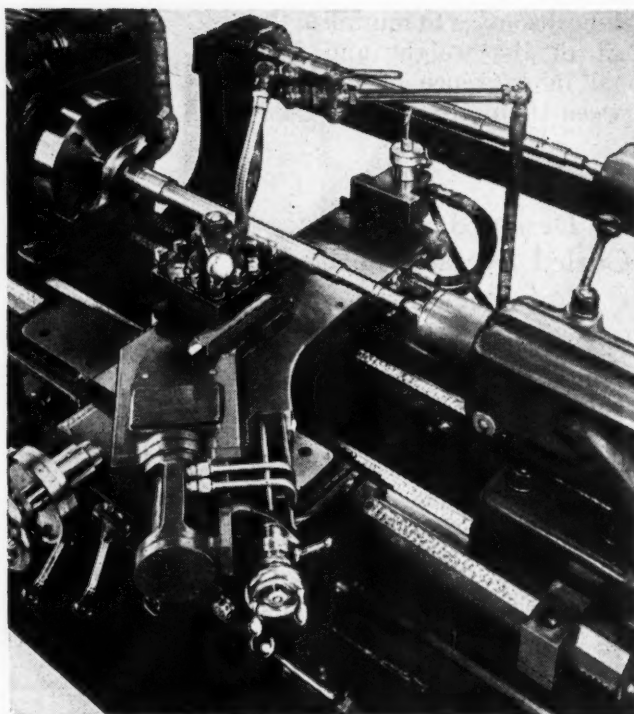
Close-up View of Hydraulic Duplicating Equipment on Lathe Shown in Fig. 1
